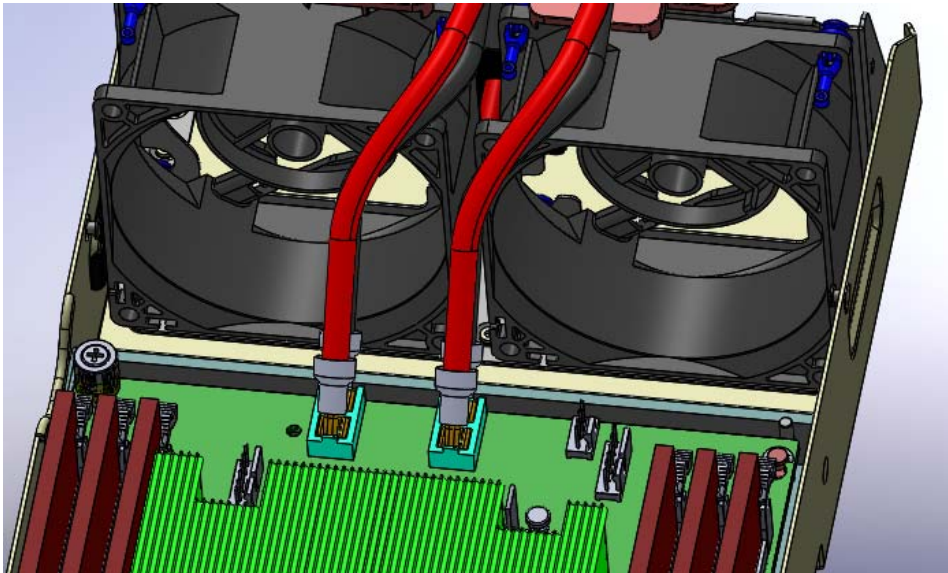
Two Pressfit Cable on Double Sided Motherboard
